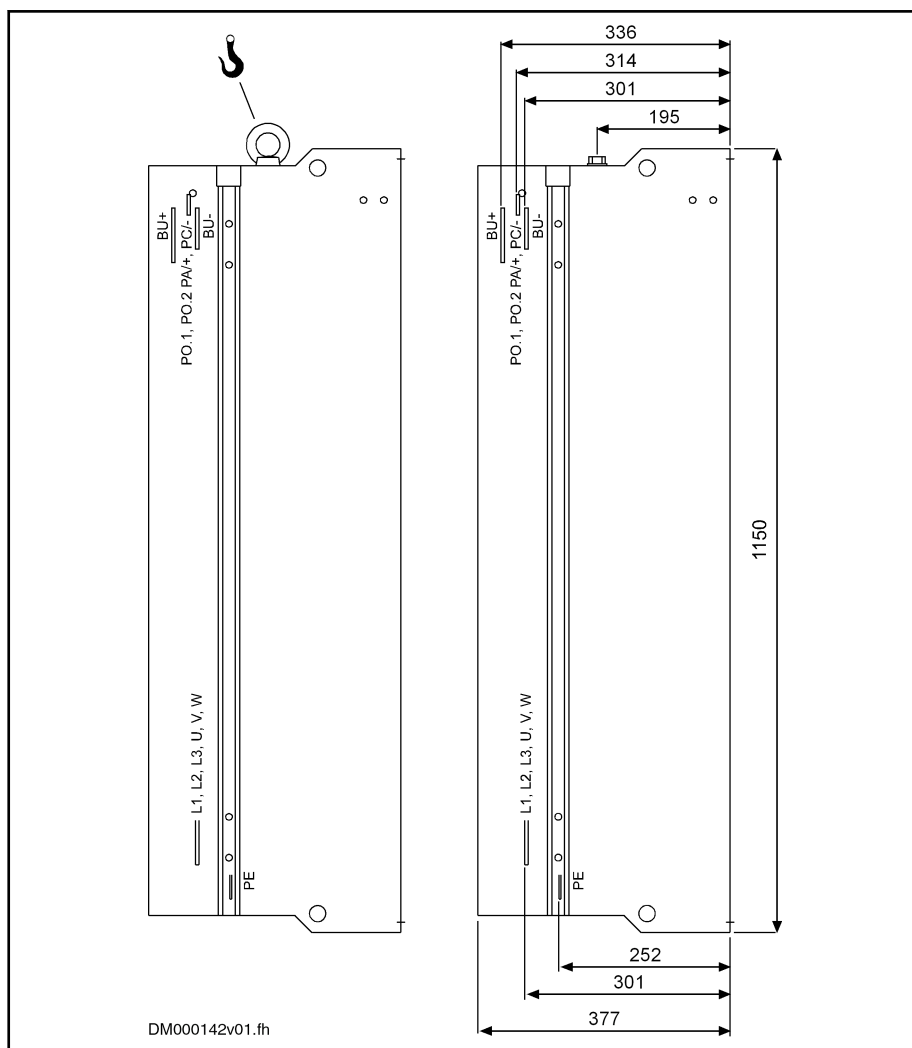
Dimensions IndraDrive HCS04.2E-W1010
